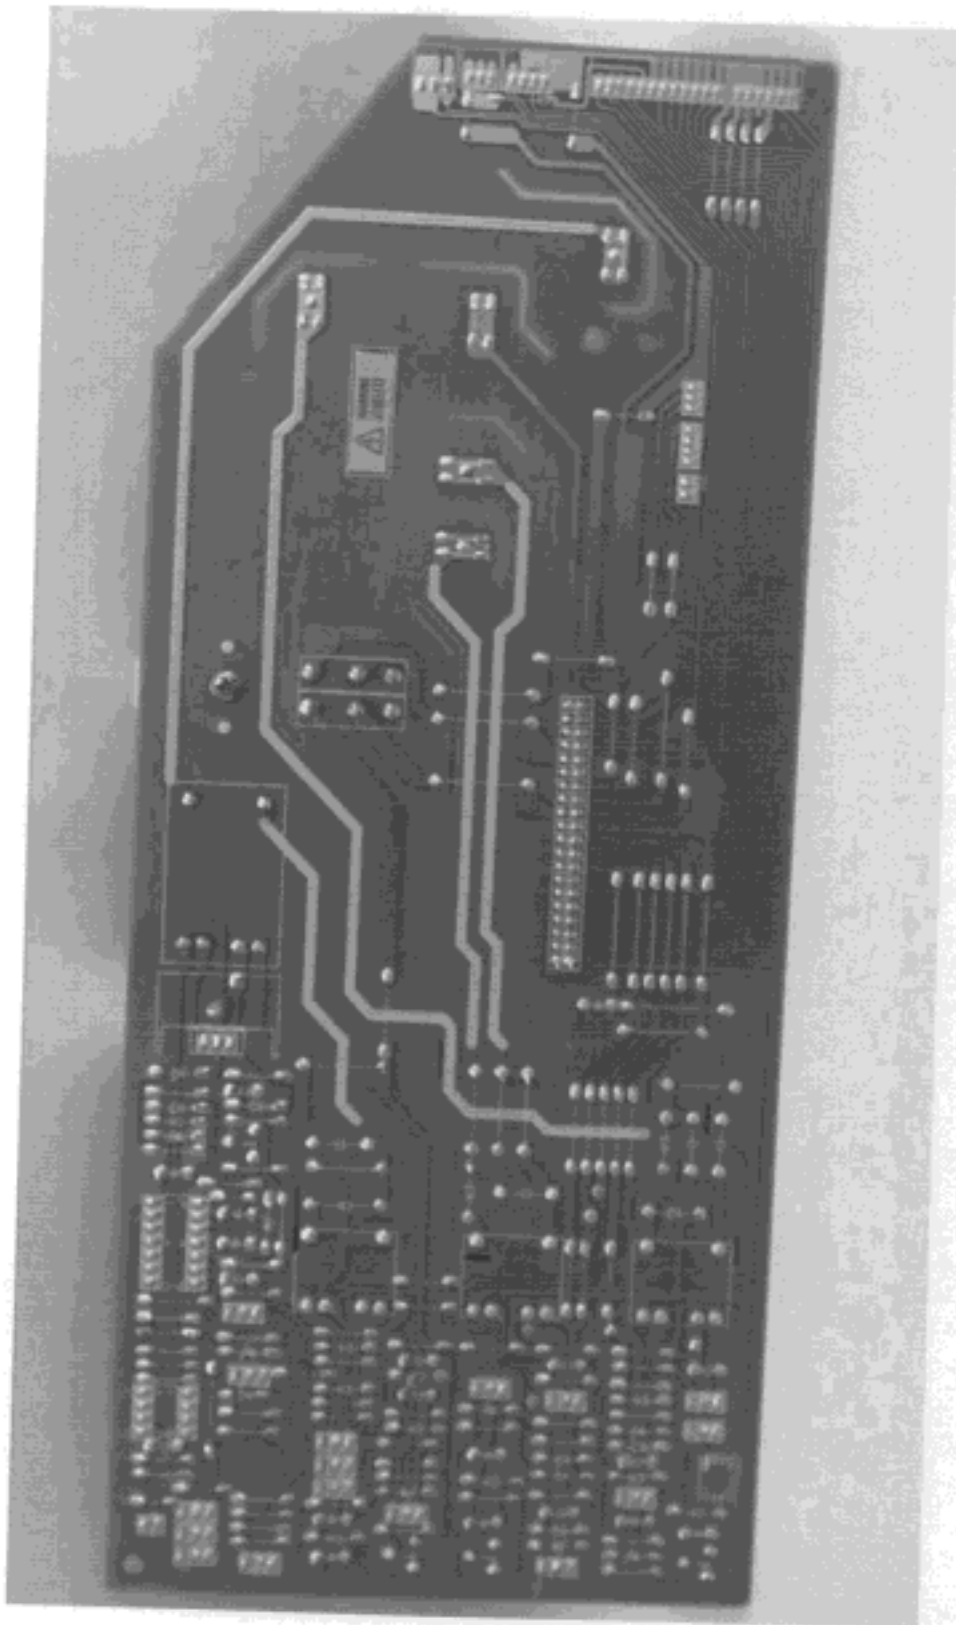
POWER SUPPLY UNIT COMPONENTS SIDE
